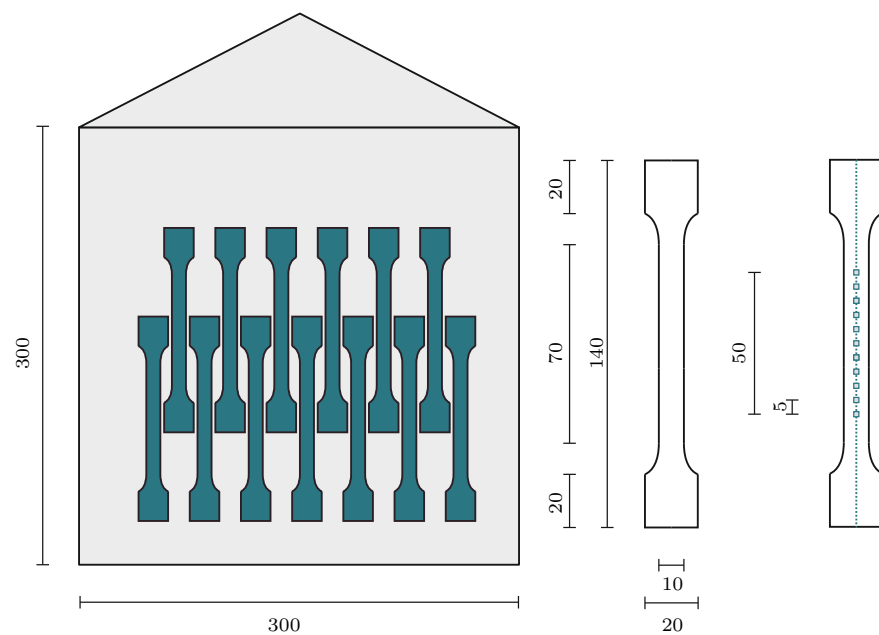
Details of the specimen geometry and the measurement points. All measures in mm, $t = 3$ mm.
